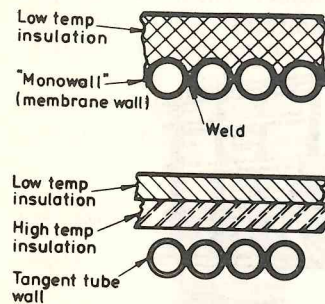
Alternative furnace tube arrangements on ESD III boiler
